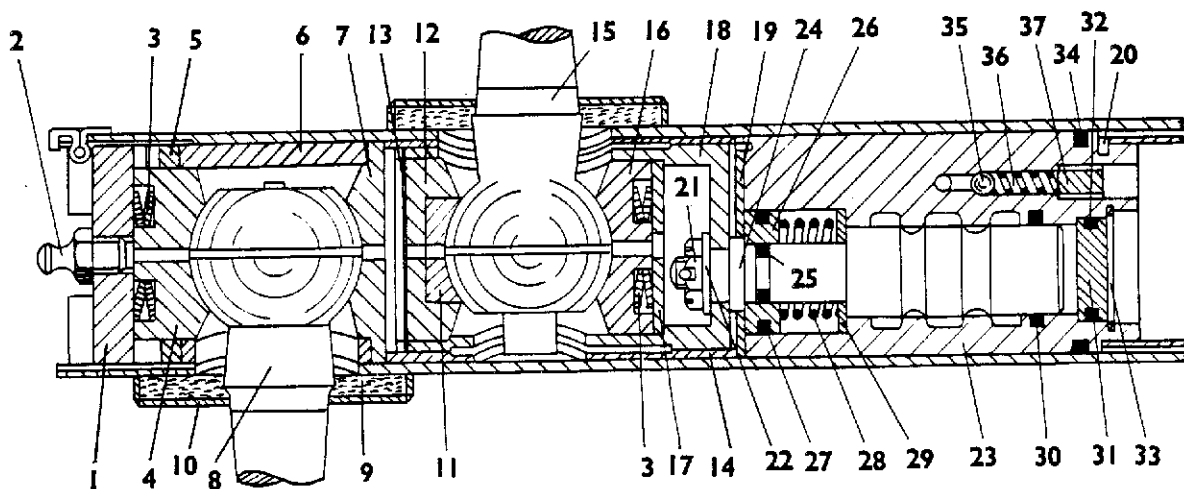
A. HYDRAULIC RAM ASSEMBLY 902357
